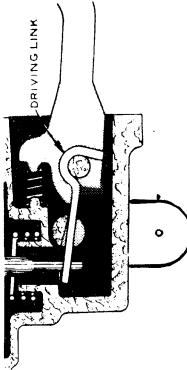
FUEL PUMP DRIVE LINK INSTALLATION
